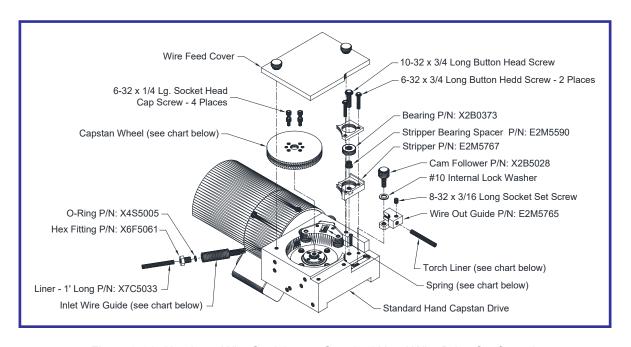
Aluminum Wire Straightener Standard Hand Wire Drive Configuration
